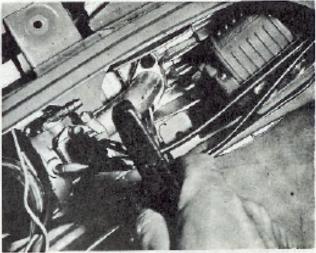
Disconnect the ignition coil, and remove the two allen screws that hold the carburetor and inlet
